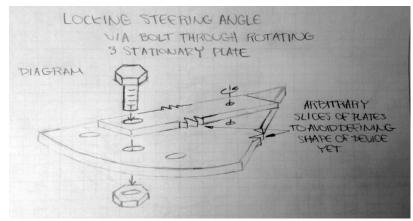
Hand sketch diagram illustrating the bolt & hole concept for locking the steering angle
